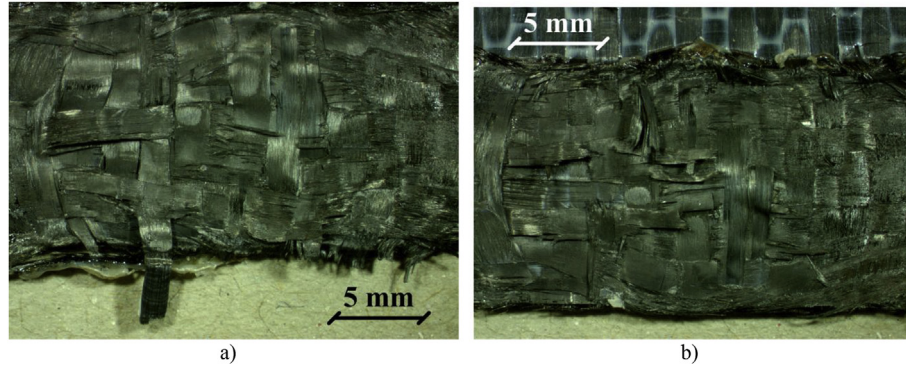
Fracture surfaces of the a) bottom and b) top adherends of specimen B03-02 (batch 3).
